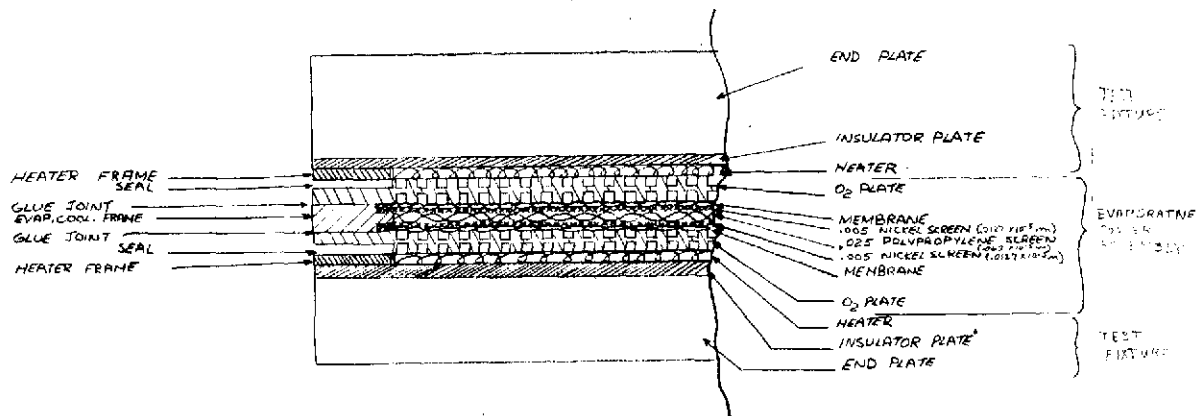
Evaporative Cooler Assembly and Test Fixture
